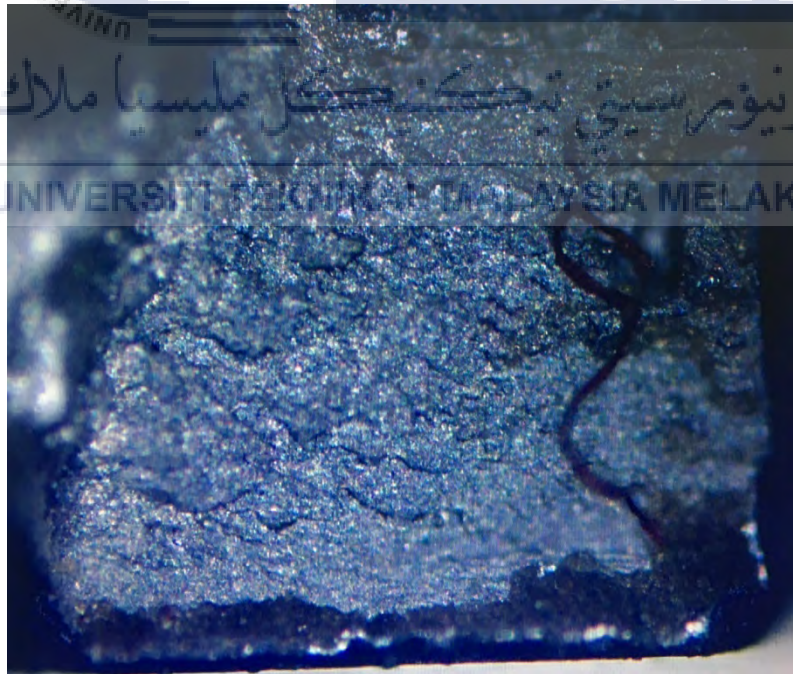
Microscopic Flat Fracture for specimen before Cold Expansion
